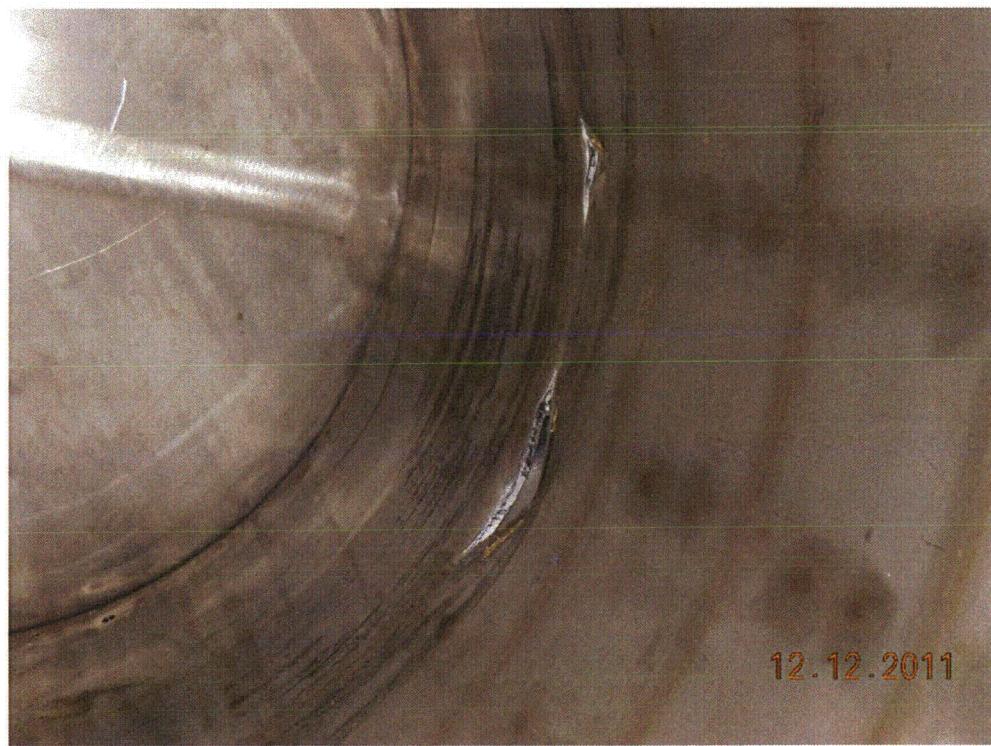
Cut in Inner Container (IC) Wall Due to Dummy Payload Side Impact
